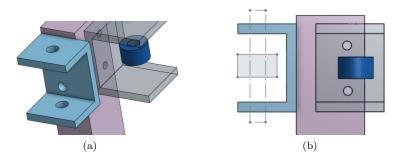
(a) isometric view of steering arm bracket, in parallel plane with the upper wishbone bracket. M8 bolt clearance hole drilled through top and bottom, M6 bolt clearance hole drilled through bracket and upright for attachment. (b) front view of steering arm bracket showing the relative location of steering arm assembly. Potential steering arm bearing represented by a gray shaded rectangle, and an M8 bolt represented by gray dotted lines.
